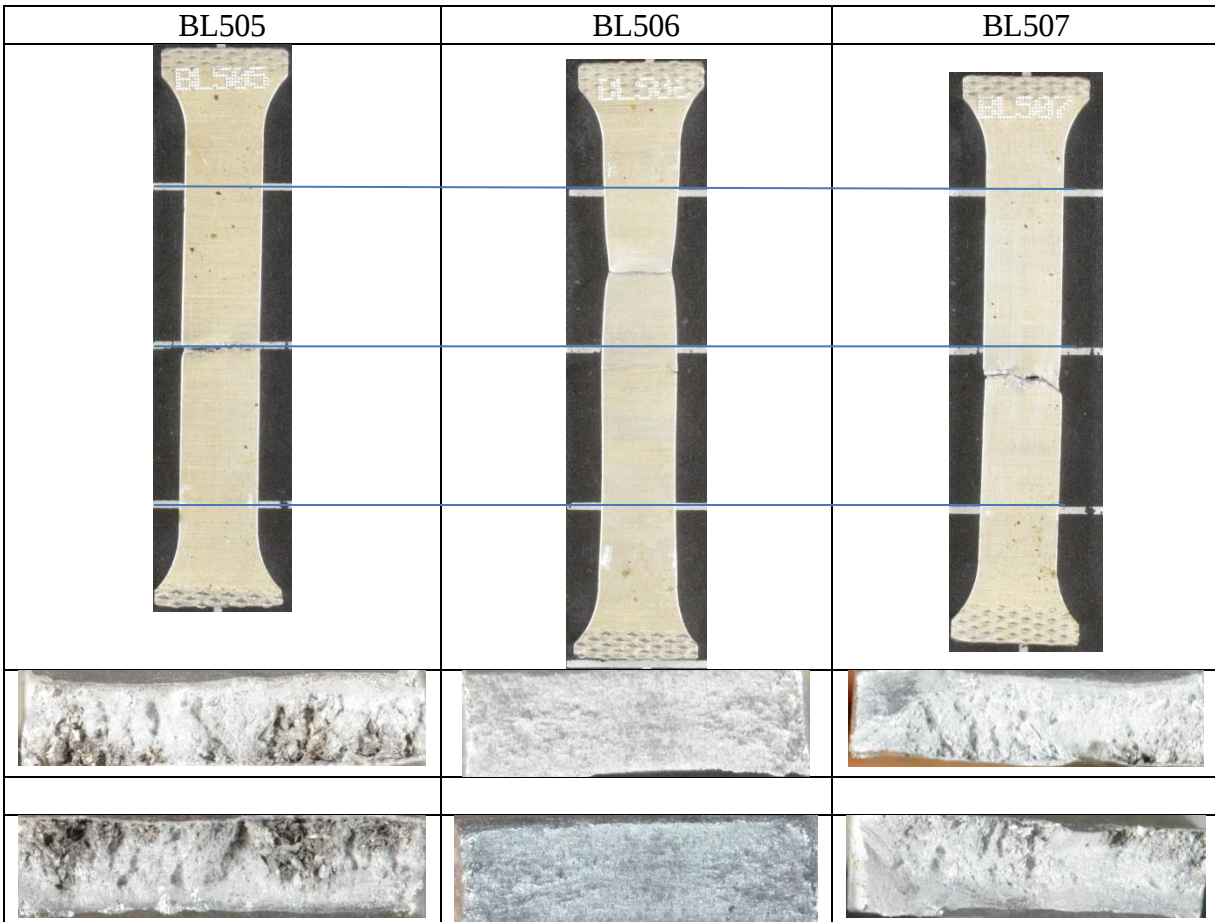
Fracture surface of AA5086-AA5086 welds at Lyon Arboretum 1-year exposure.
